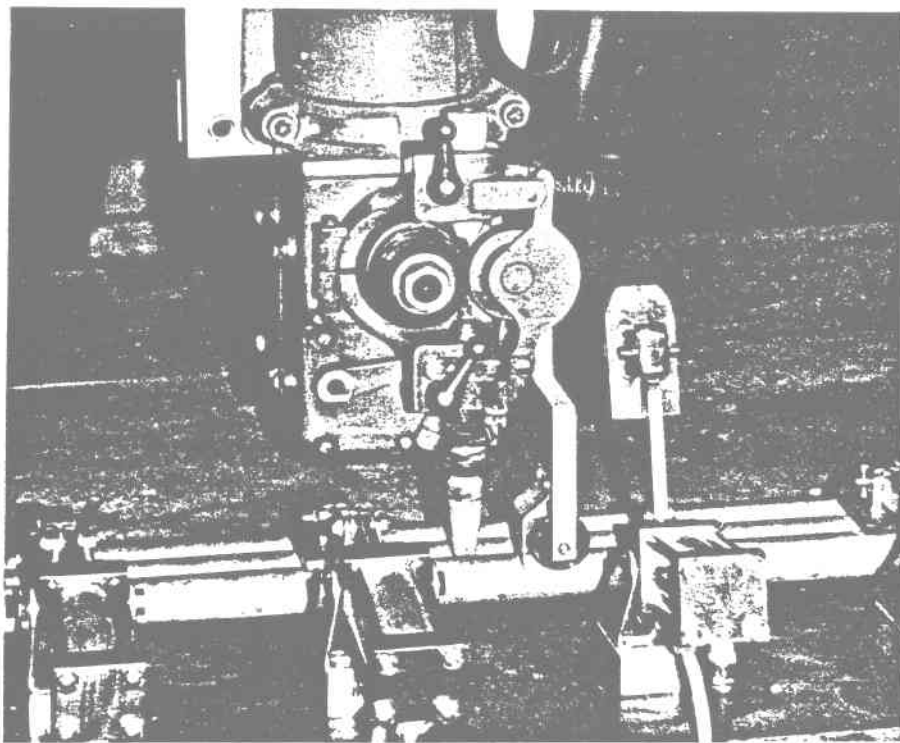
Metal Inert Gas (MIG) Welding Head
